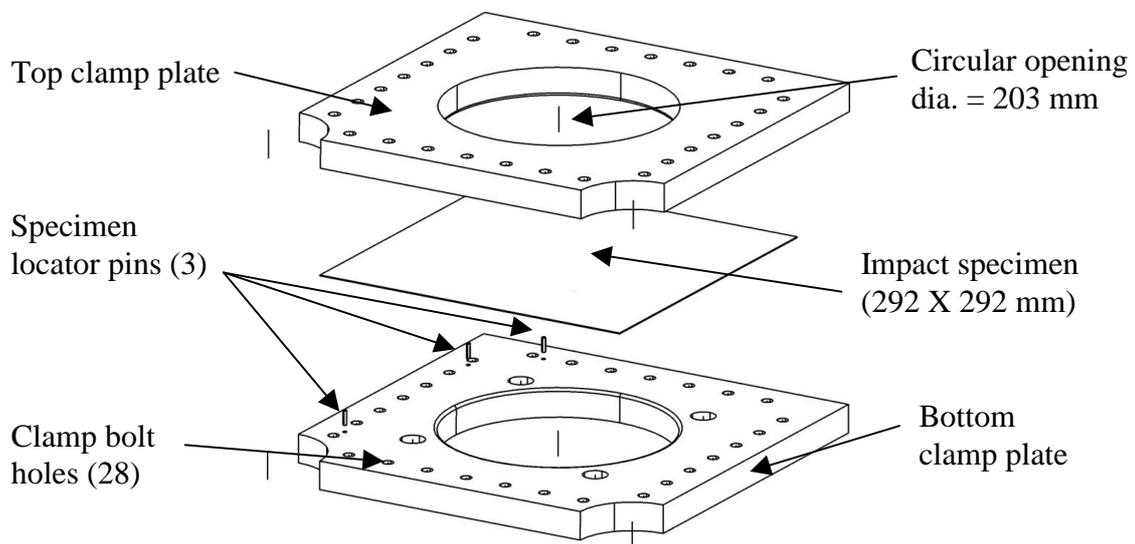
IAR-NRC impact specimen clamping fixture, manufactured from mild steel.
